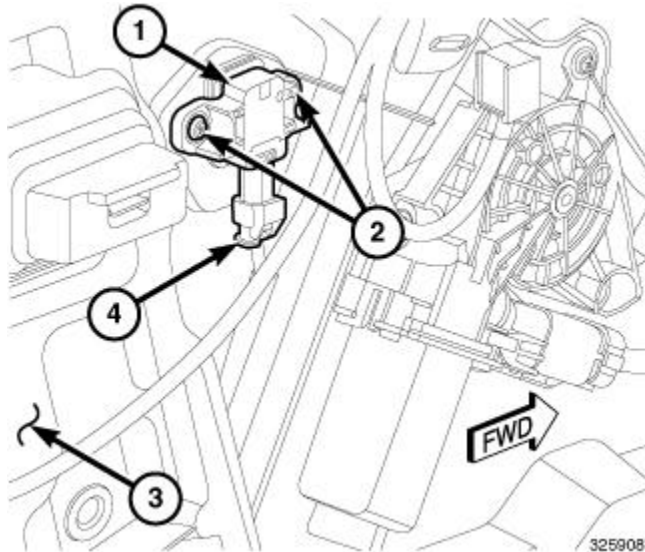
Front Door Wire Harness Connector, Side Impact Sensor, Two Screws & Front Door Hardware Module Carrier Panel
